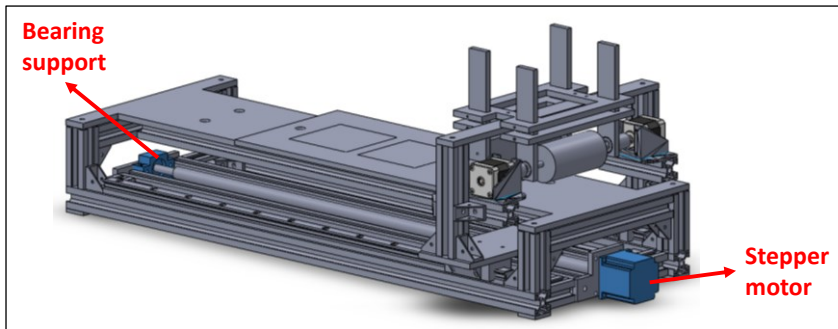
Coupling of the screw with the stepper motor and the bearing support.
